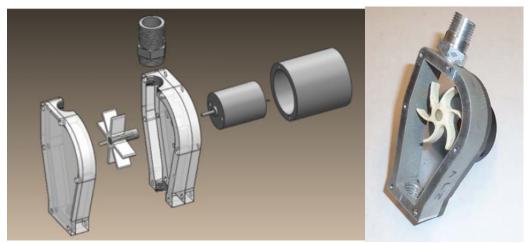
An example of a student-designed faucet-powered electrical generator, exploded CAD view on left, final machined prototype on right.
